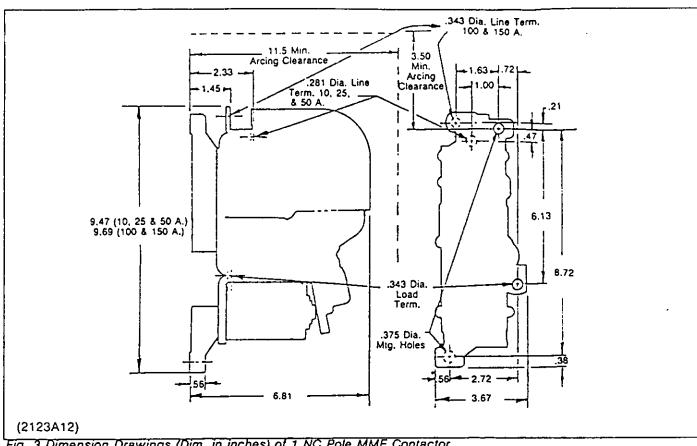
Dimension Drawings (Dim. in inches) of 1 NC Pole MME Contactor
